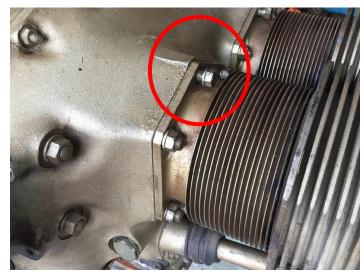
Cylinder with a finger-tightened nut that is not properly torqued.
